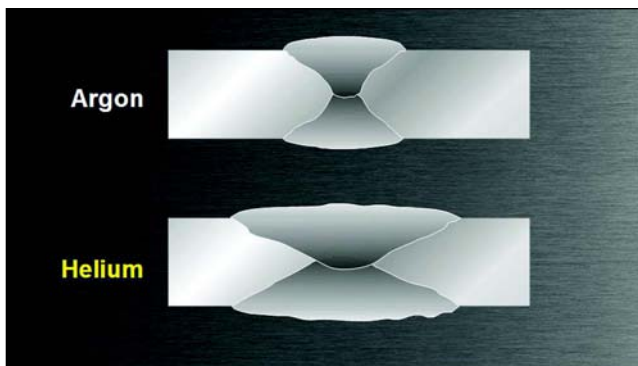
Cross Section of GMAW Welds Made with Pure Argon and 75% Helium 25% Argon
